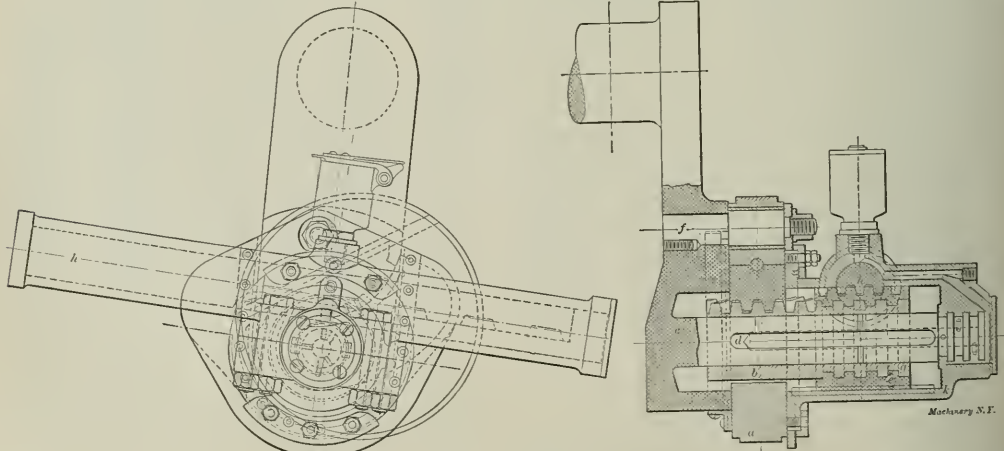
Section and Side View of the Lentz Reversing Mechanism.
